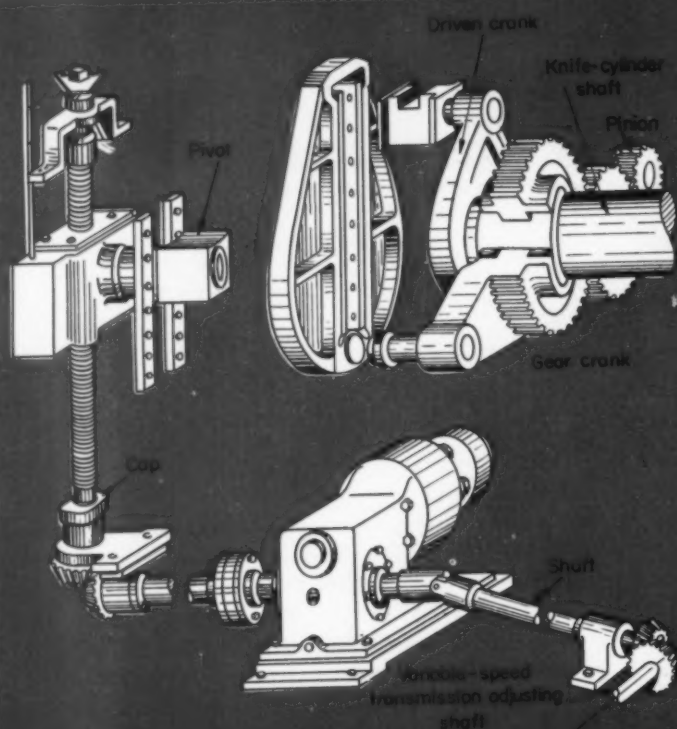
Left — Schematic view showing how pilot gearmotor controls speed ratio of variable-speed transmission and pivot position of double-crank drive
